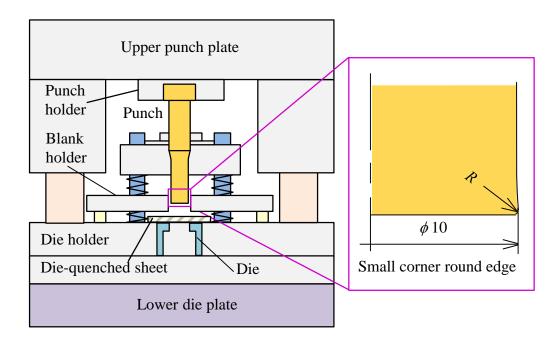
Tools for small clearance punching of die-quenched steel sheets.
